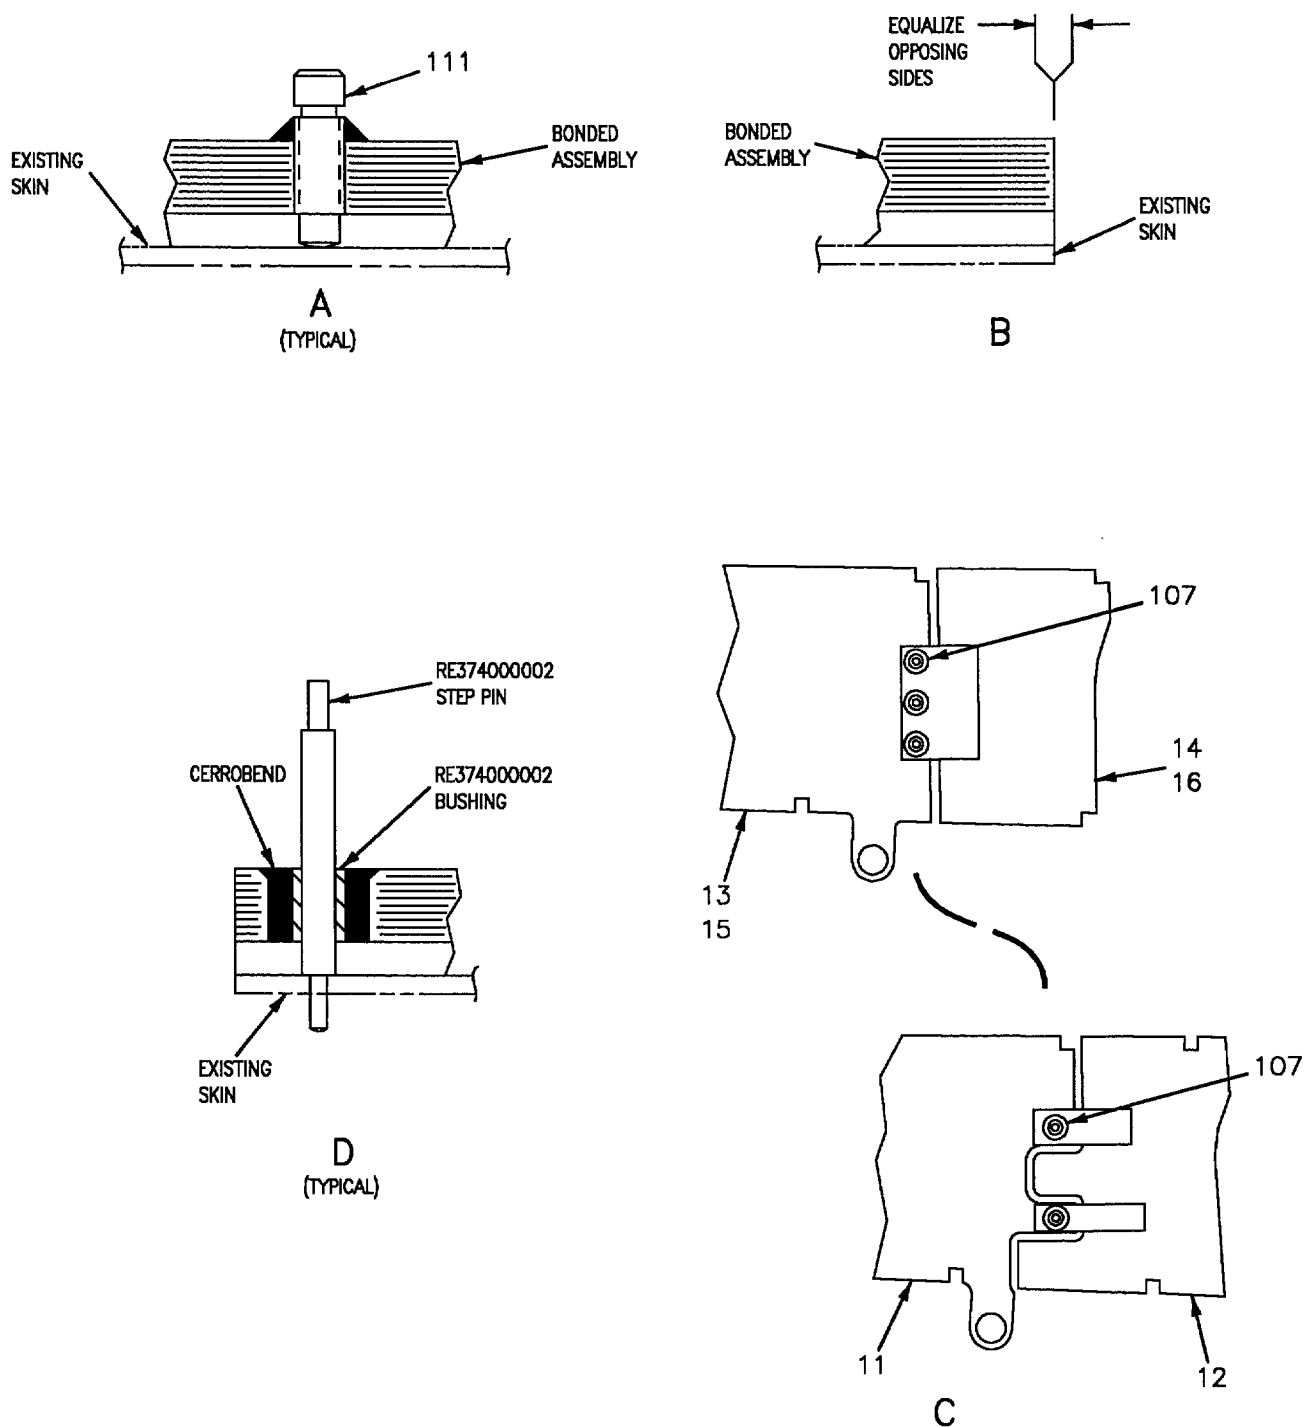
Installation of Plate Set for Drilling Substructure (Sheet 3)
